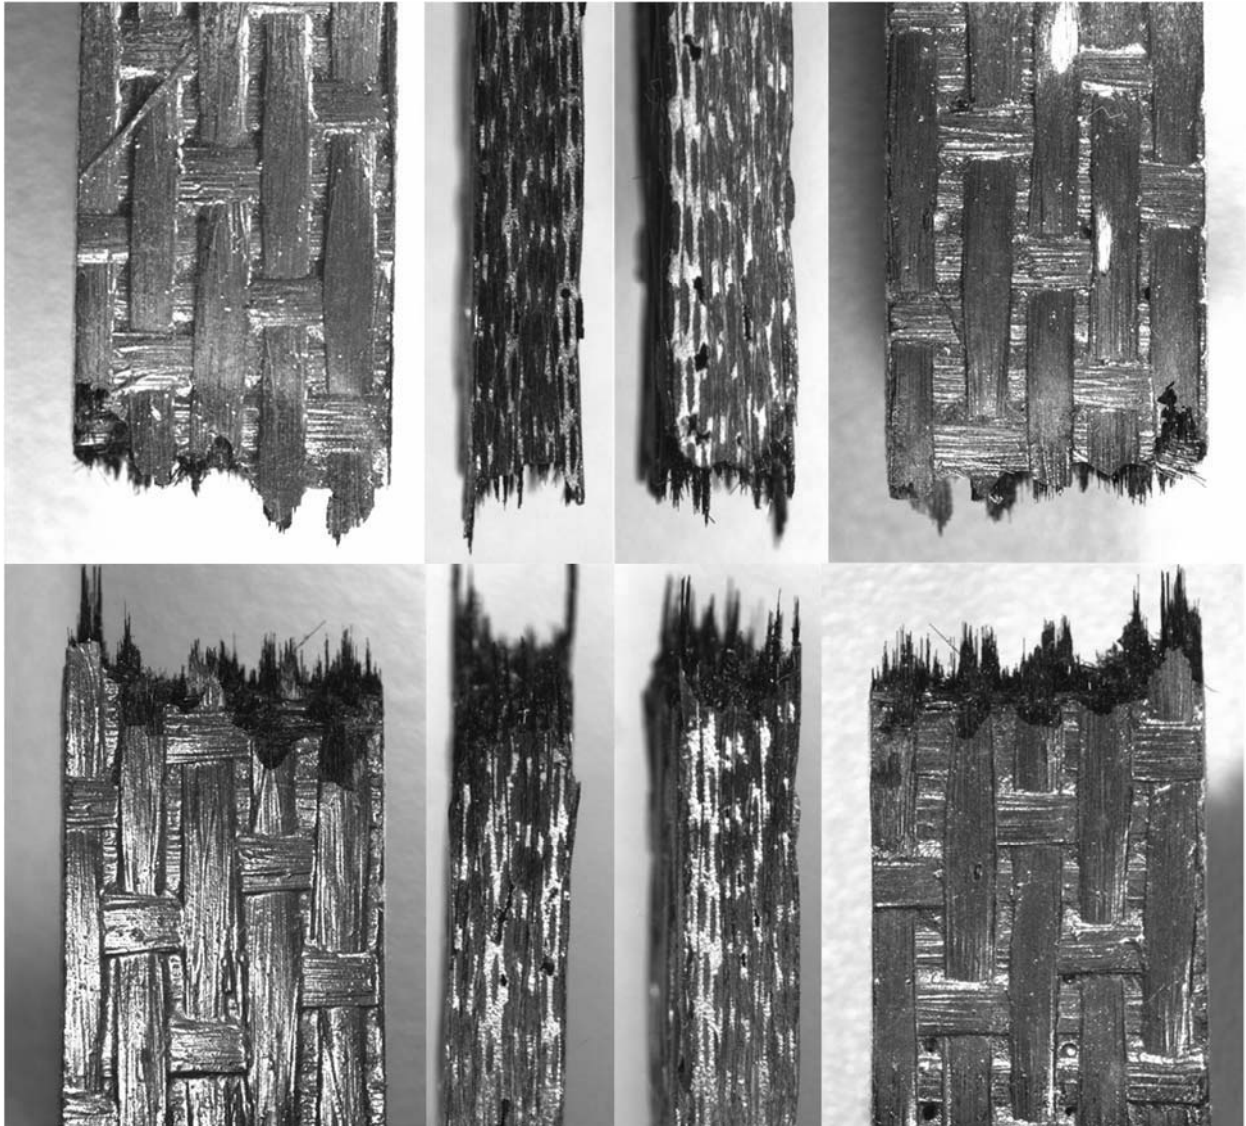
Top and bottom fracture surfaces of specimen 16-033, tested in fatigue at 1200°C in steam. $\sigma_{\max} = 100$ MPa, $N_f > 200,000$.
